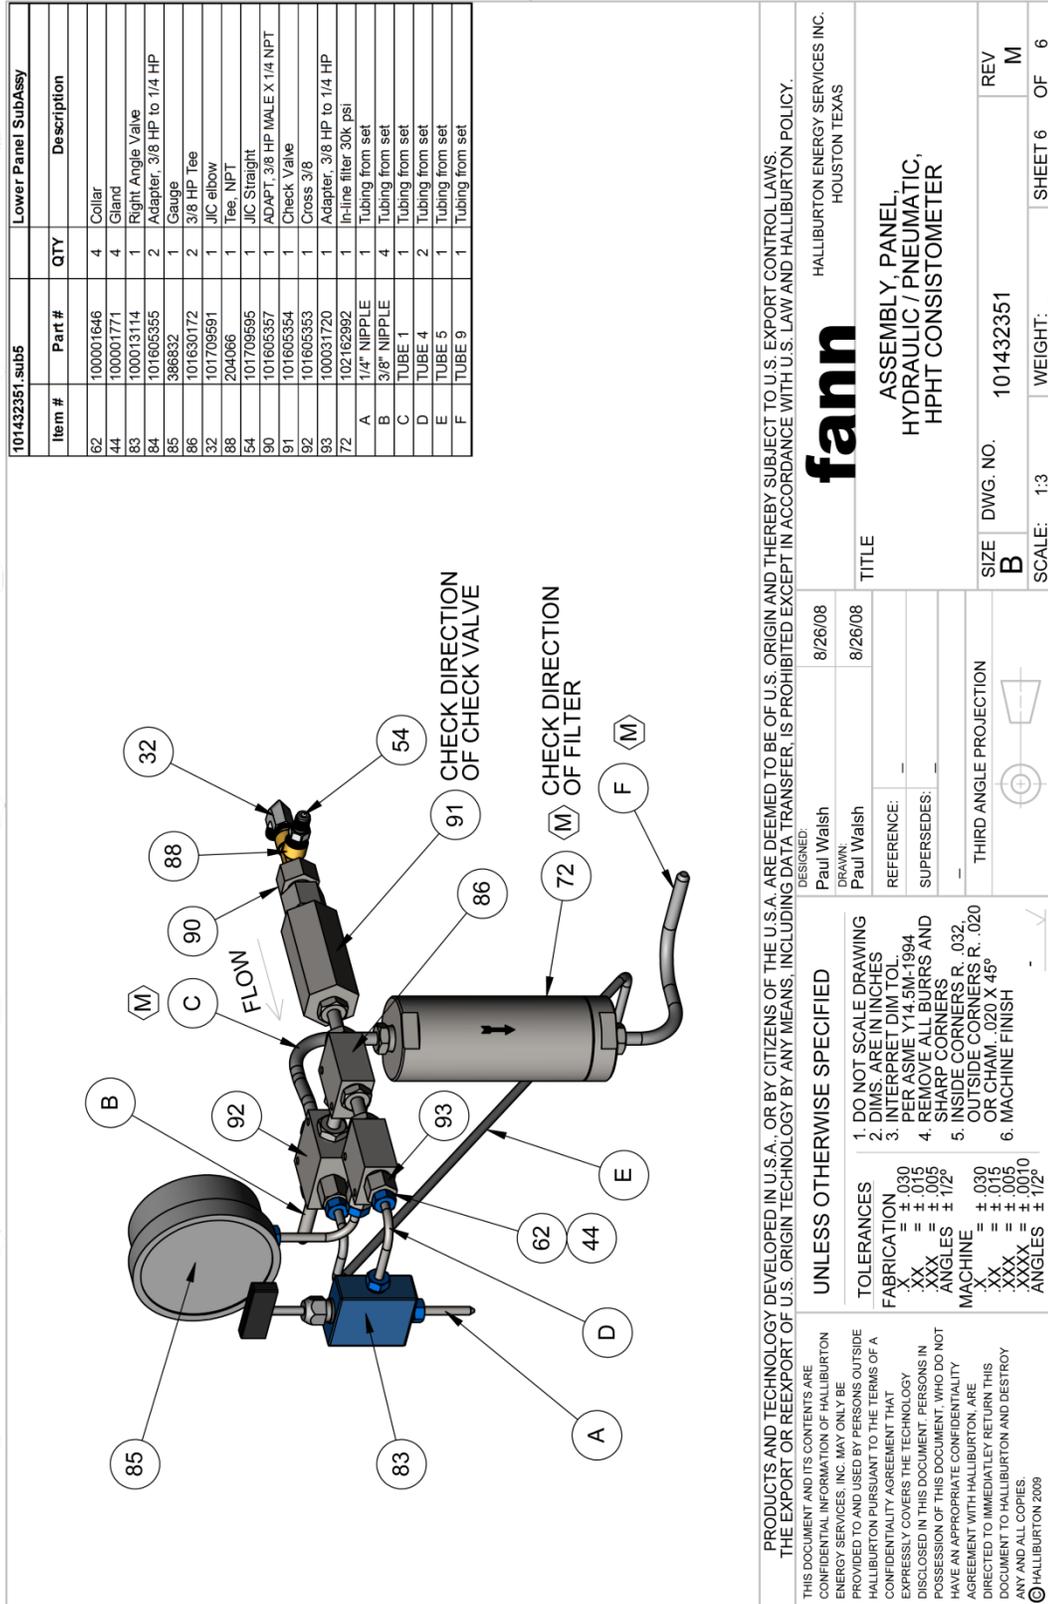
Hydraulic/Pneumatic Panel Assembly, 6/6
